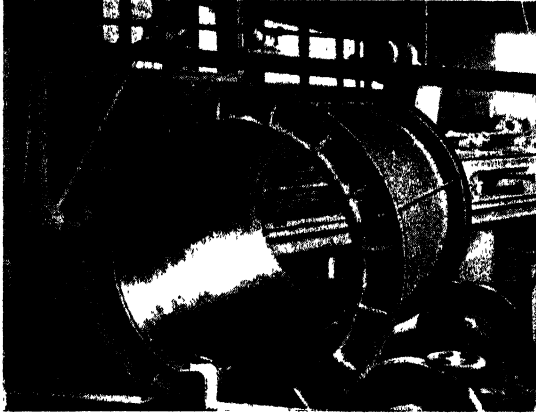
SHOWING INTERNAL SURFACE OF SPUN CONCRETE PIPE
